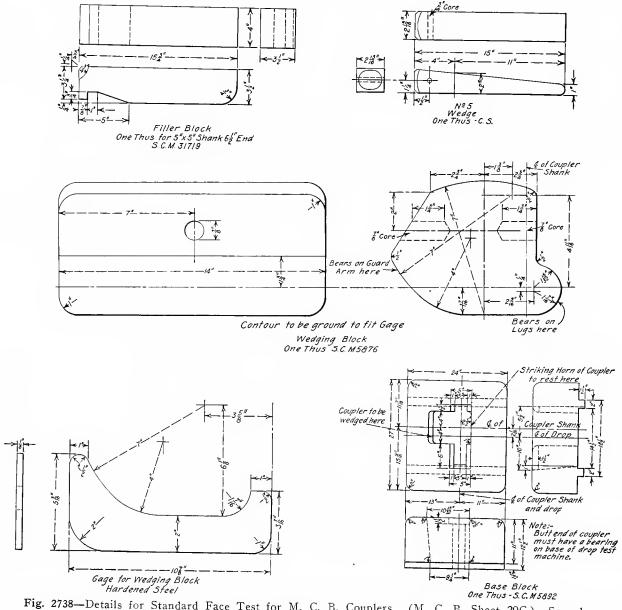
Details for Standard Face Test for M. C. B. Couplers. (M. C. B. Sheet 29C.) See also Fig. 2737.
